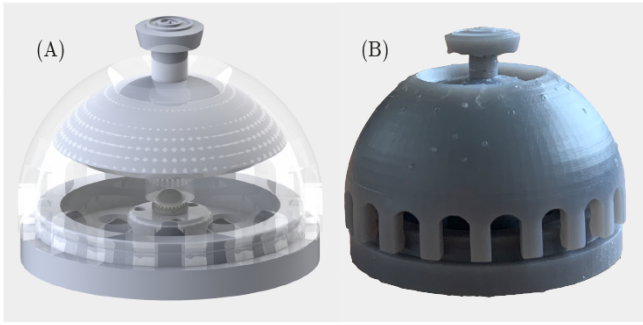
The assembled joystick design. A) 3D drawing of the joystick design to validate working principle. B) The assembled joystick design manufactured by 3D-printing.
